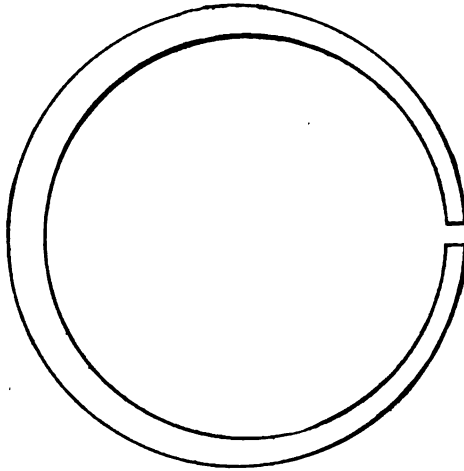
Piston Packing Ring for a Gas Engine Cylinder. The inner and outer circumferences are eccentrically arranged, so as to permit of considerable expansion under heat.
